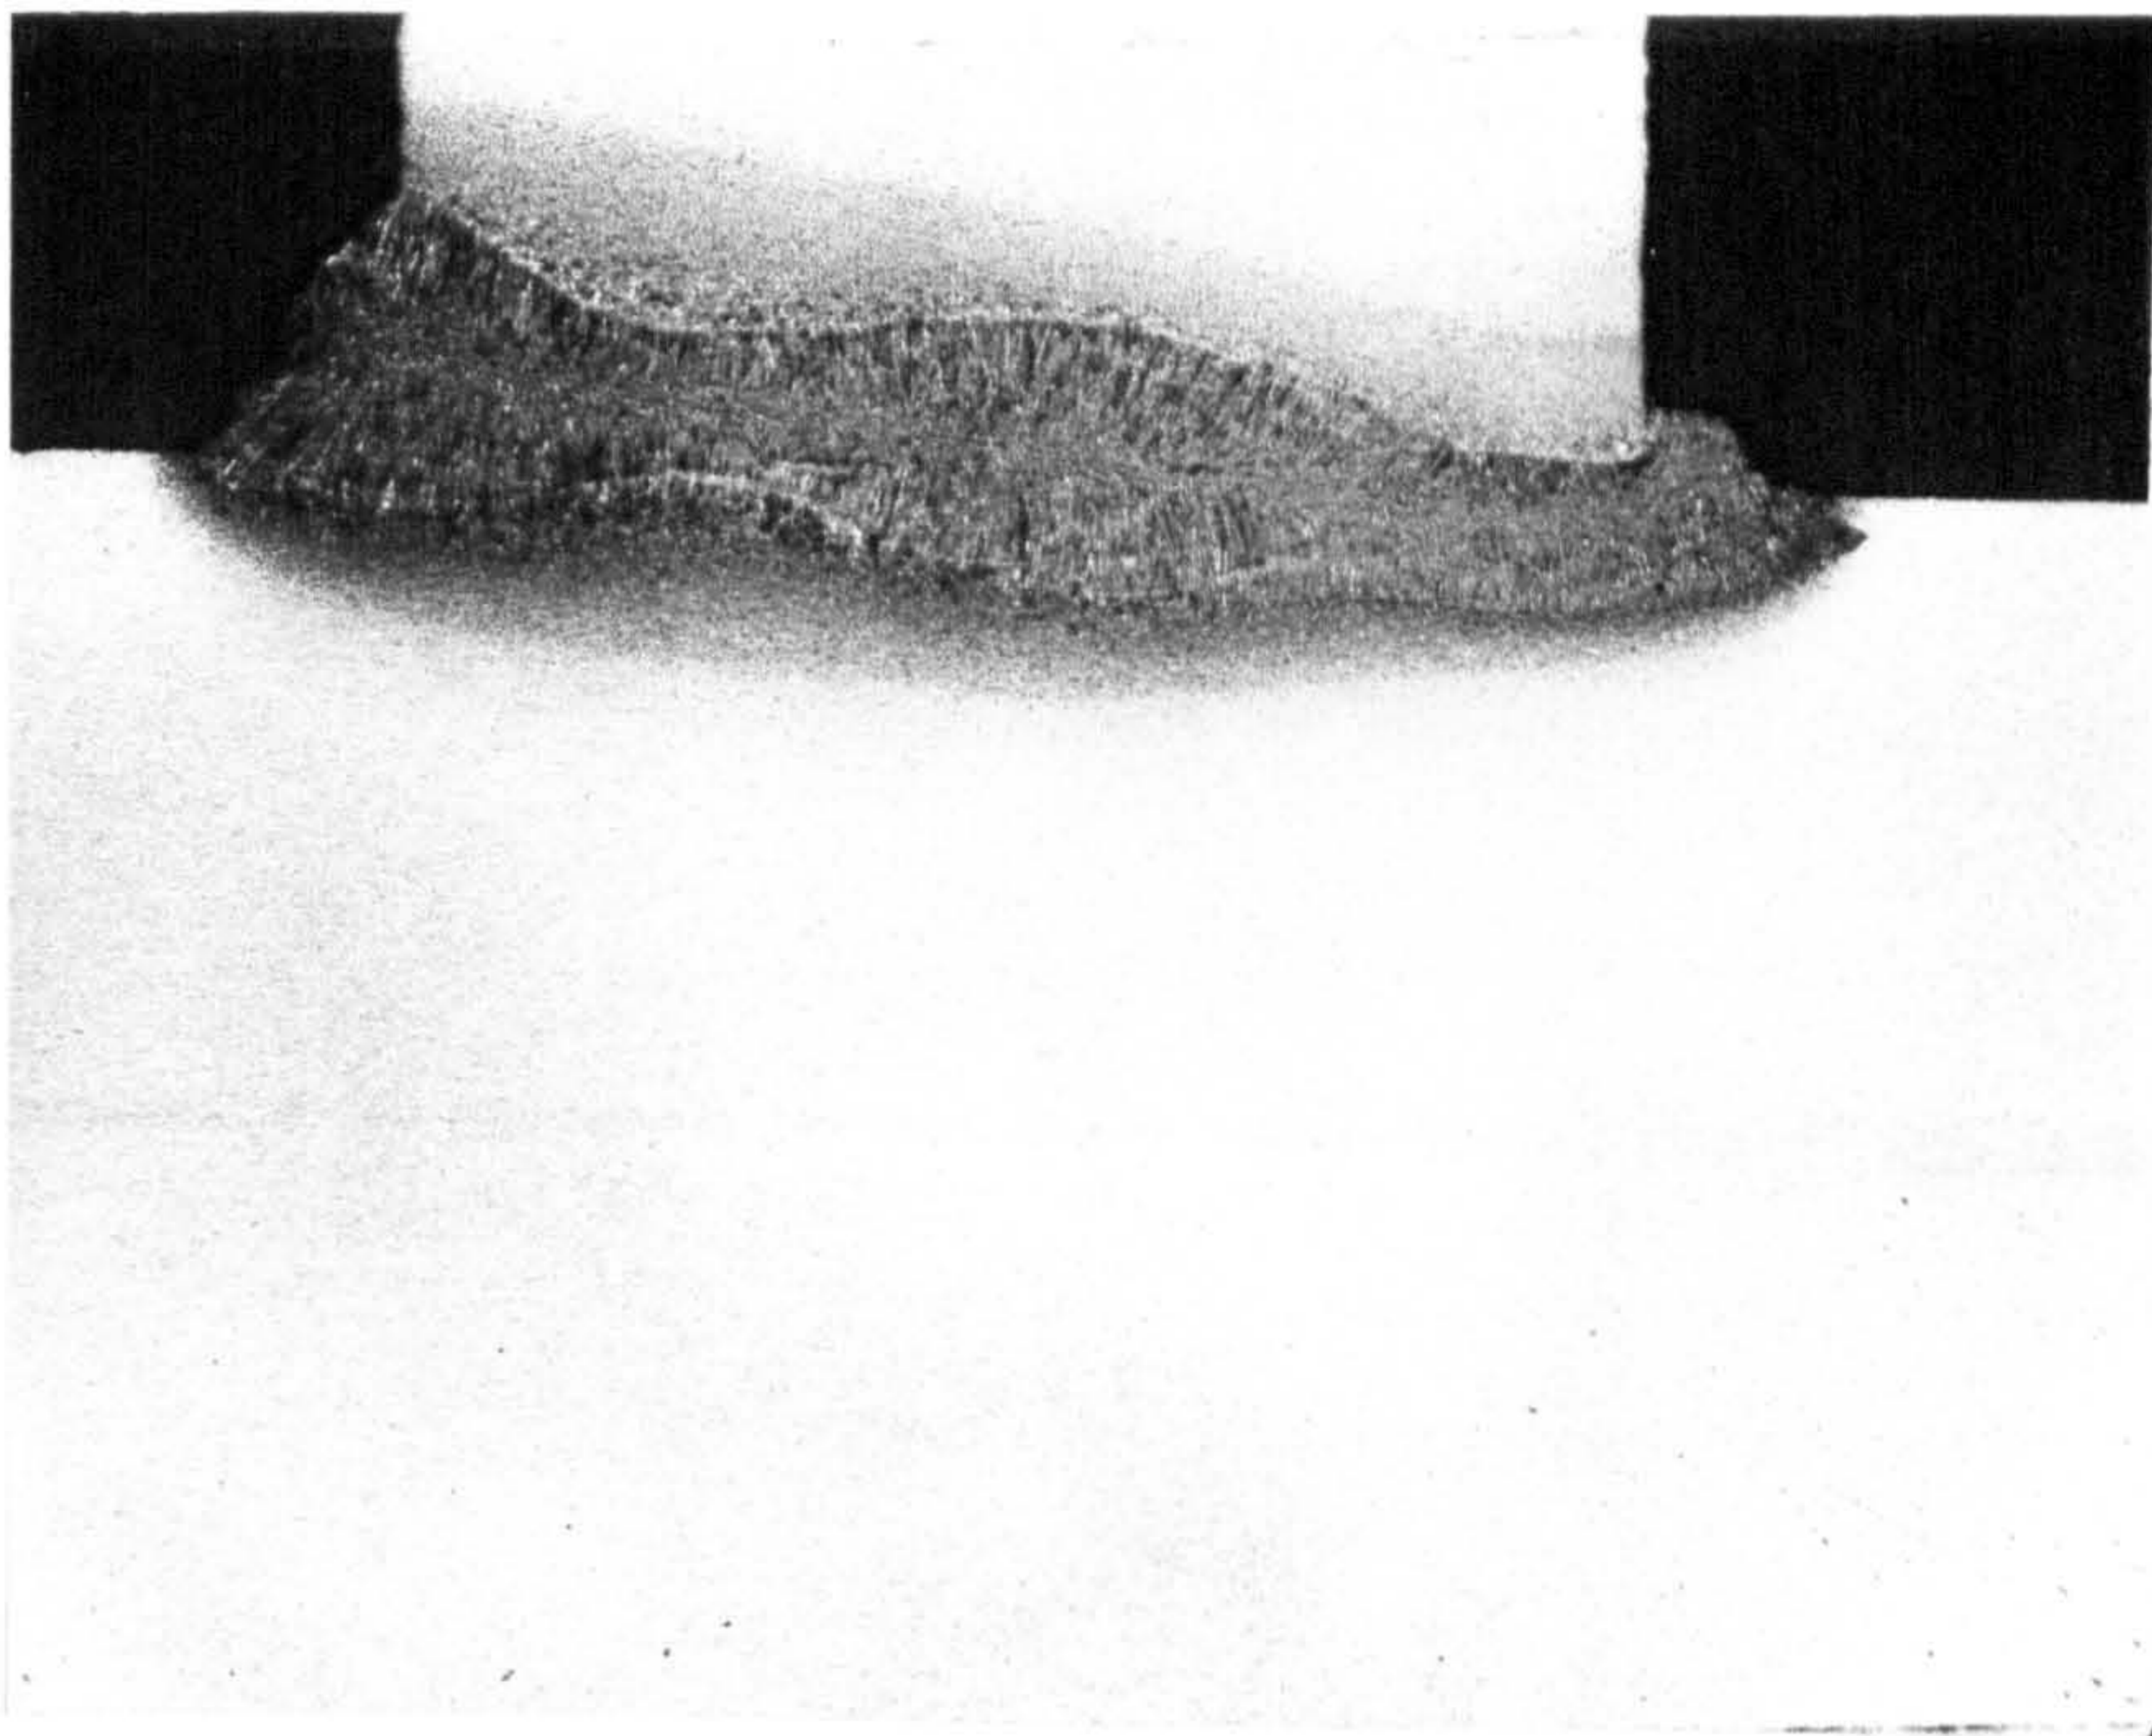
Macrophoto (x4.8) of a skid weld in 15mm thick plate (power = 9kW)
